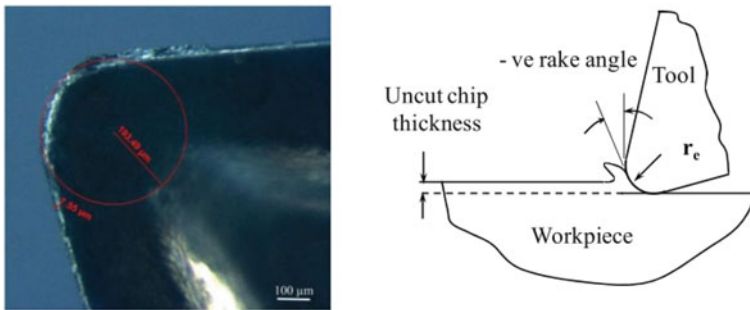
Cutting tool insert with edge radius and schematic of negative rake angles while machining. *Image courtesy* Jagadesh et al. [9] and Shunmugam [11]
